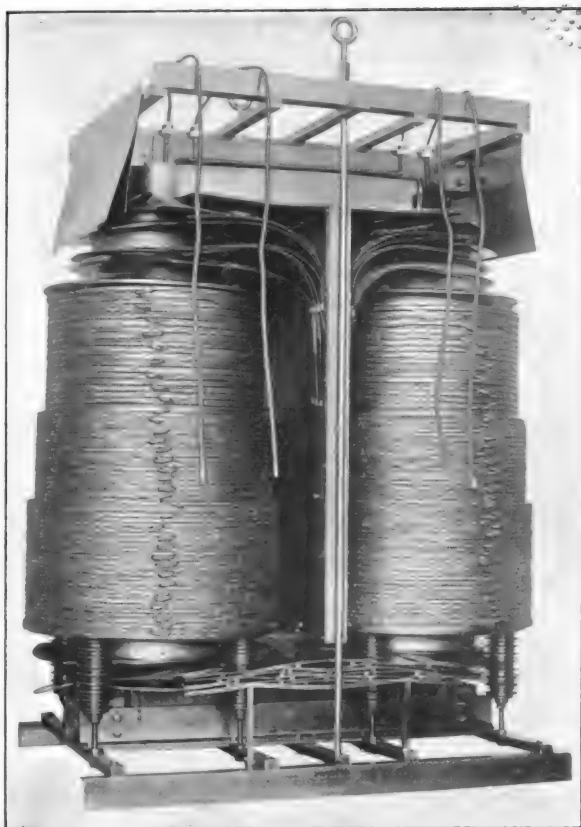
Windings of 750,000-volt Testing Transformer.
